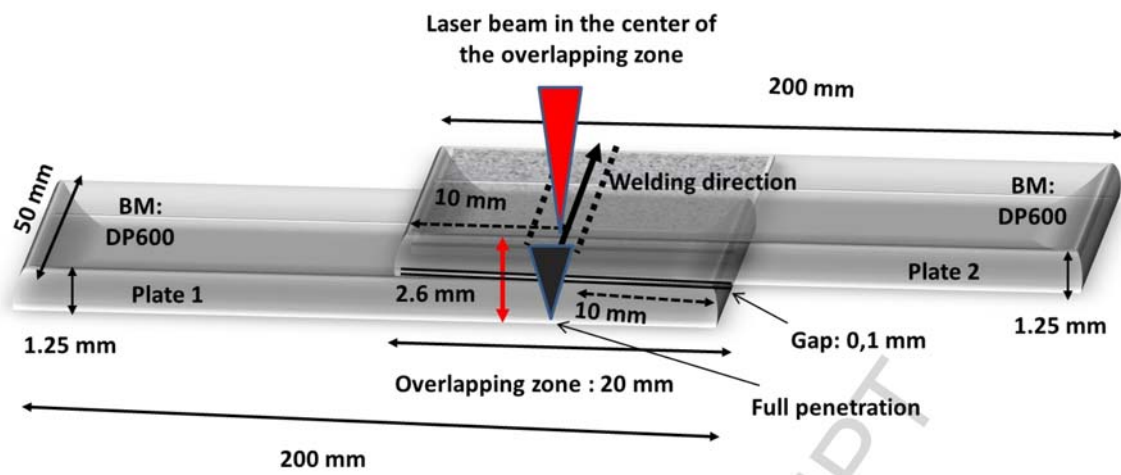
Conditions of laser welding, geometry and dimensions of sample
